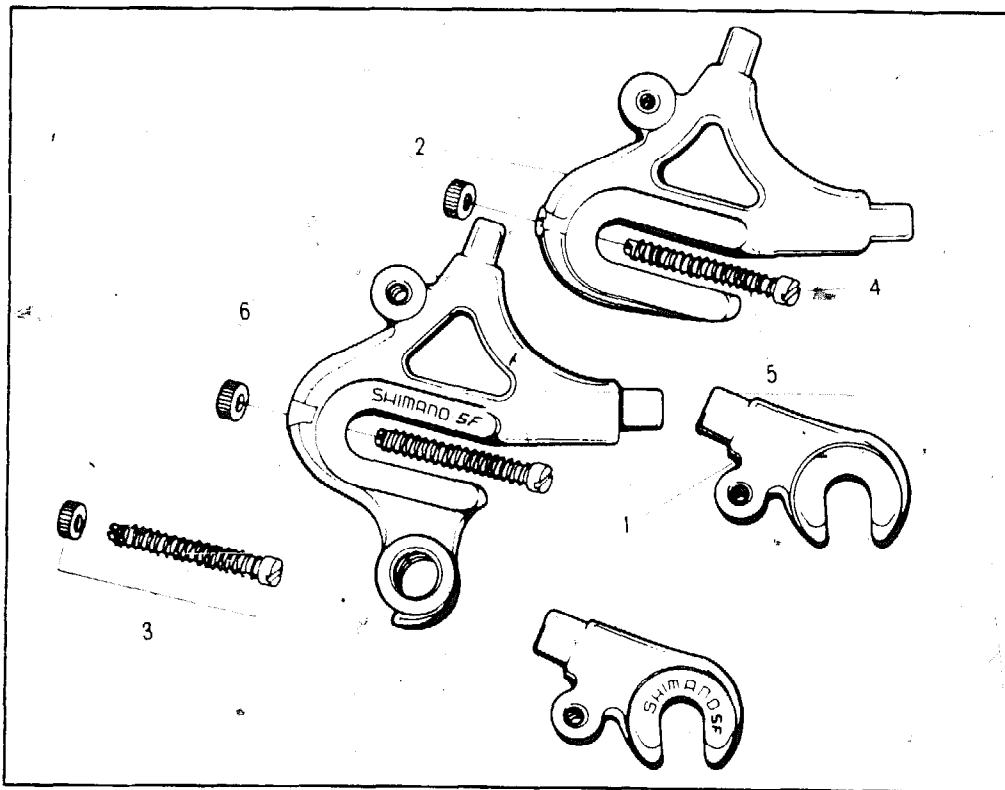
Shimano Dura-Ace Model NB-100 drop-outs: (1) front fork end set, (2) rear fork end set with adjusting set, (3) adjusting bolt, nut and spring, (4) adjusting bolt, (5) adjusting spring and (6) adjusting nut.
